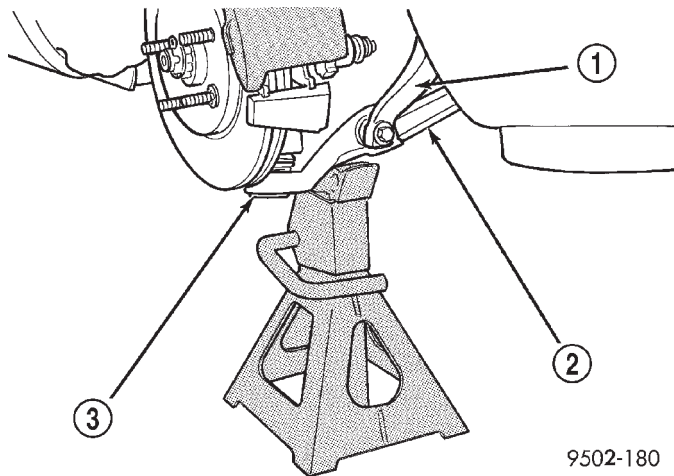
Lower Control Arm Correctly Supported By Jack Stand
